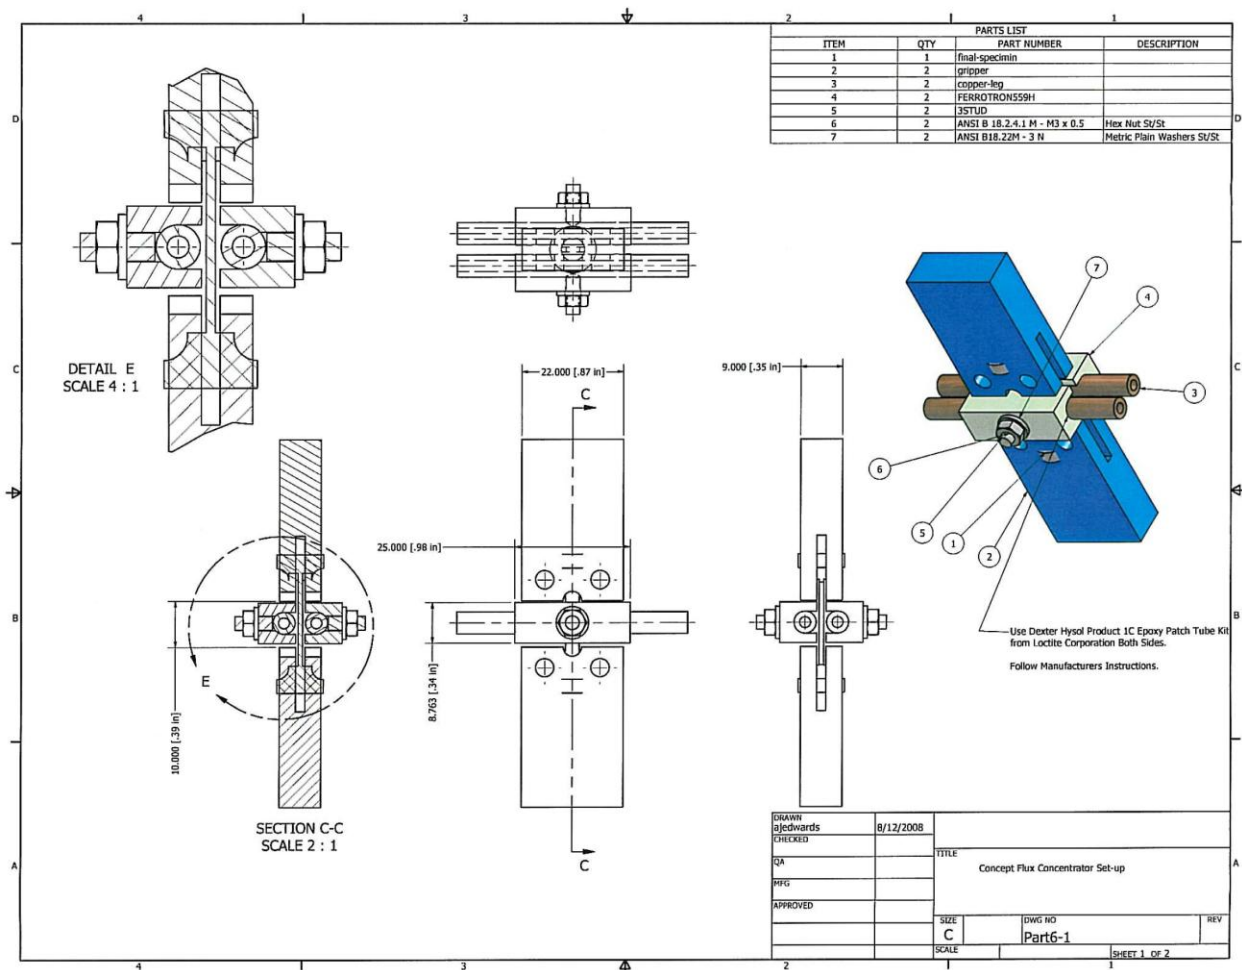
CAD drawing for the flux concentrator (Fluxtrol).
